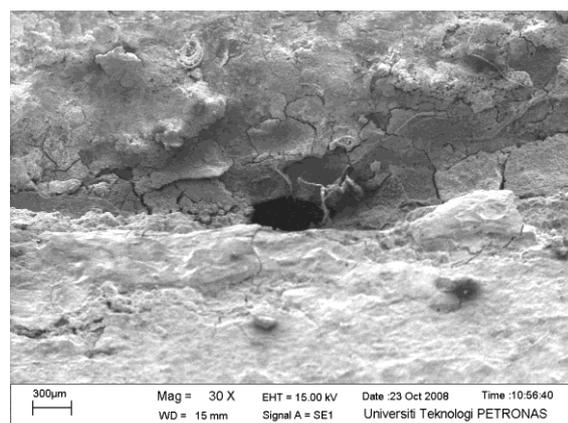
SEM fractograph shows the pin hole on welding line.
